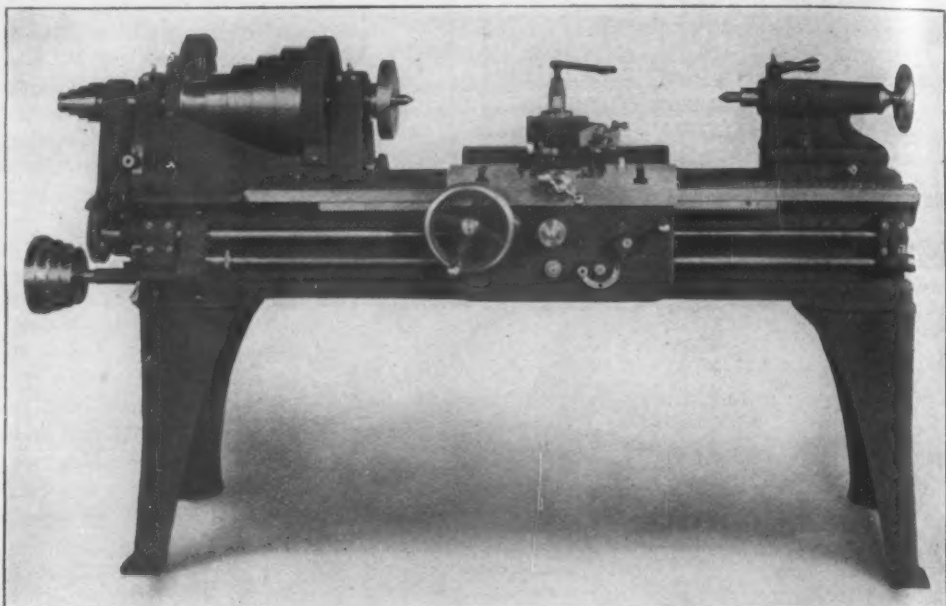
A New 16-In. Geared Head Lathe Built by Fay & Scott, Dexter, Maine.
